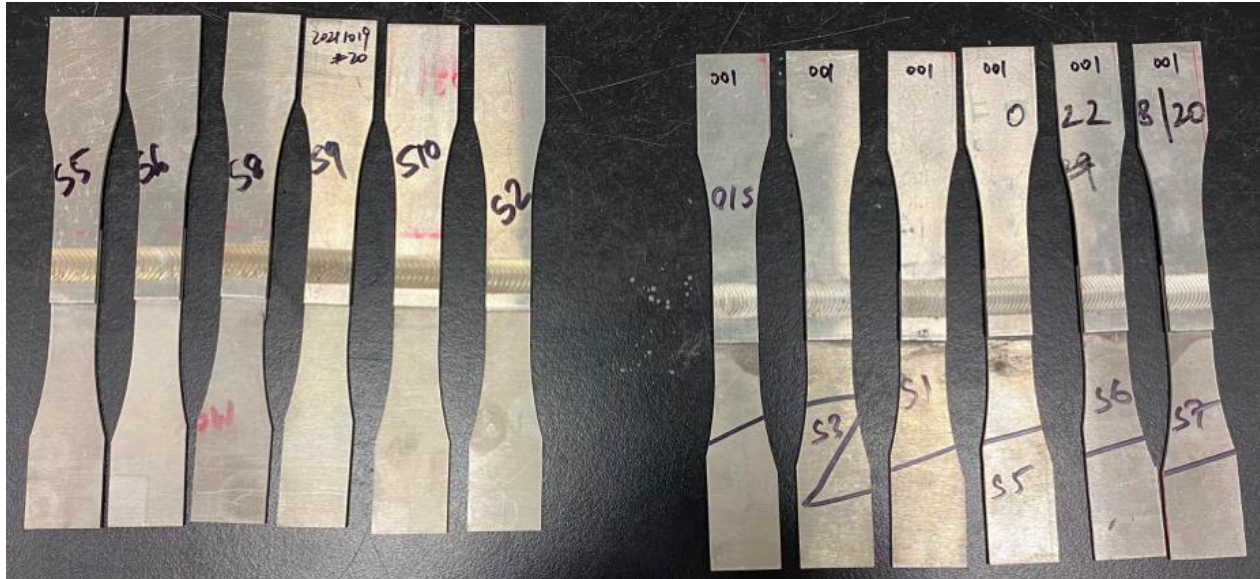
Specimens cut by EDM for fatigue testing. (Left: FSW, Right: Adhesive-FSW).
